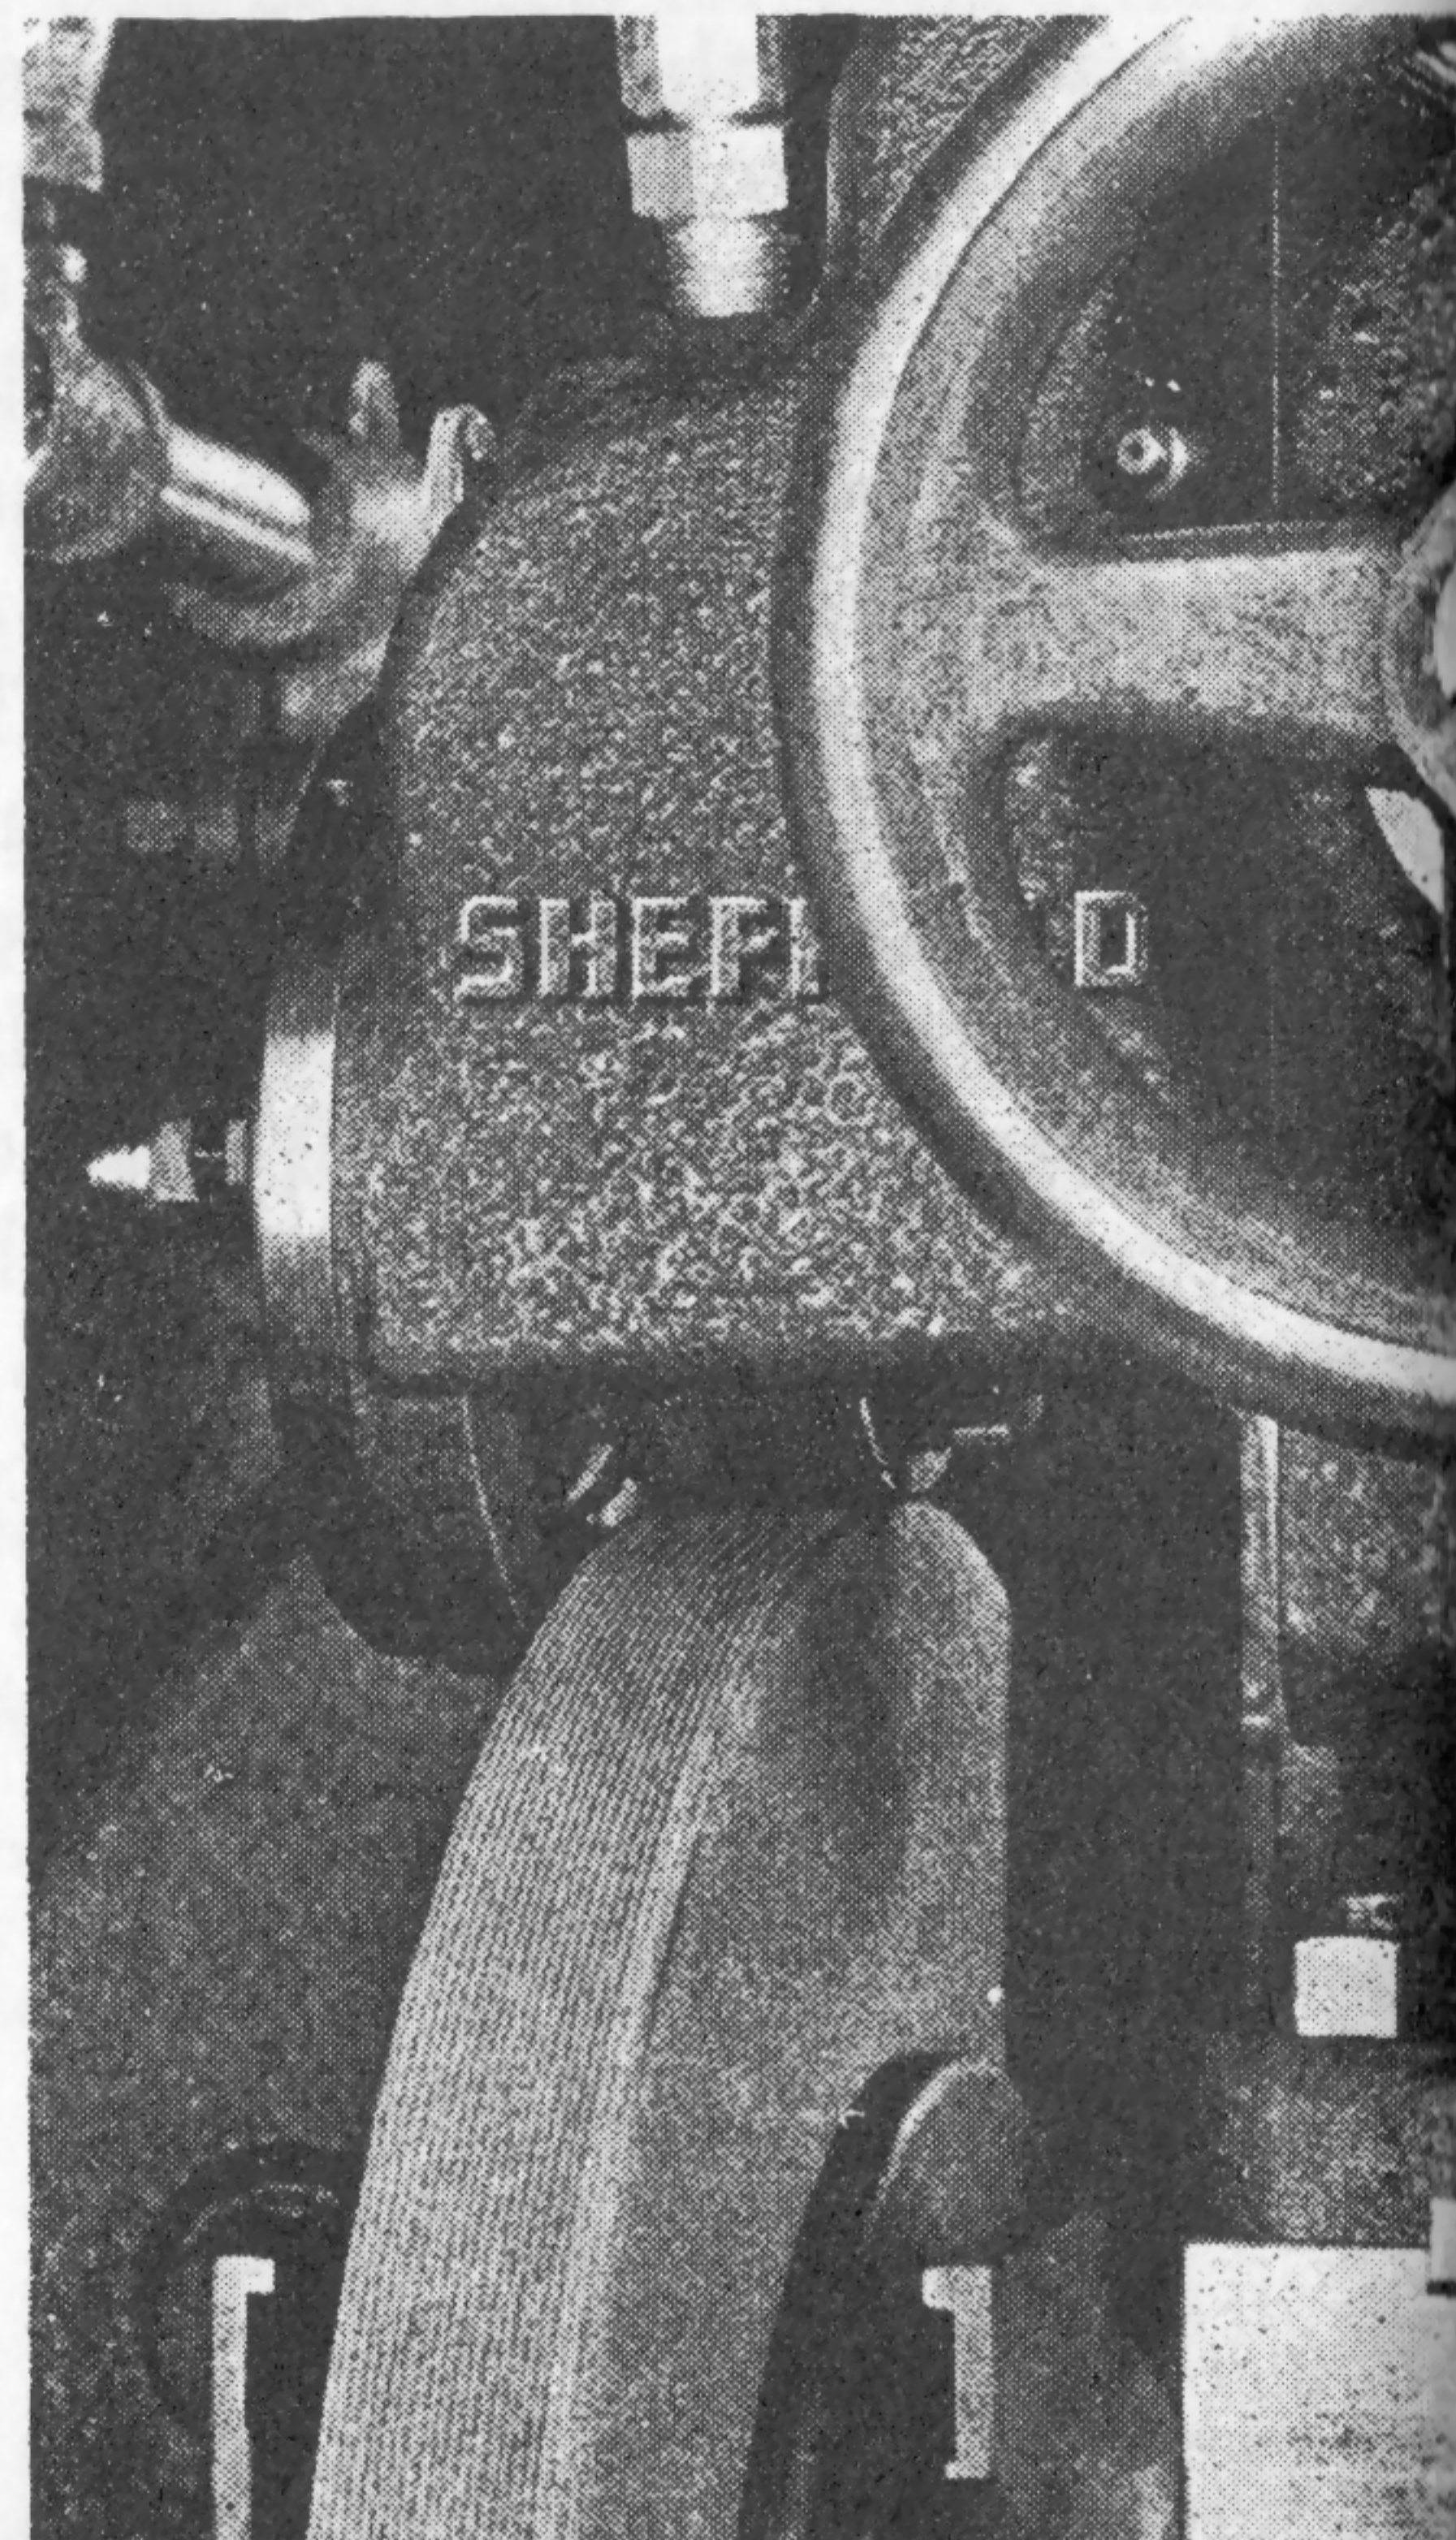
CRUSH FORMING A GRINDING WHEEL (Lewis)
